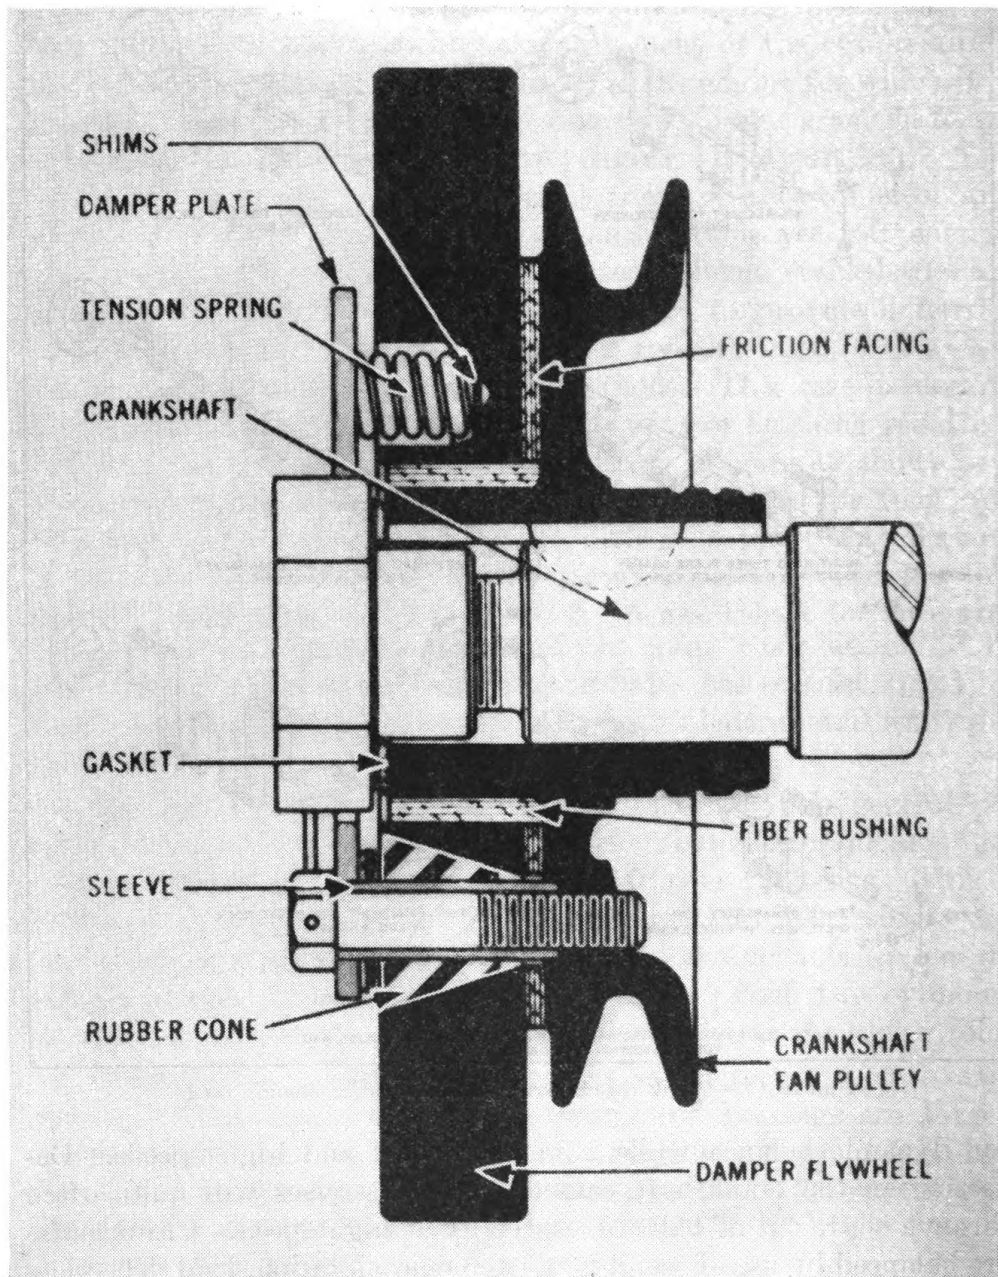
Torsional vibration damper of friction type mounted at fan pulley drive end of crankshaft.
